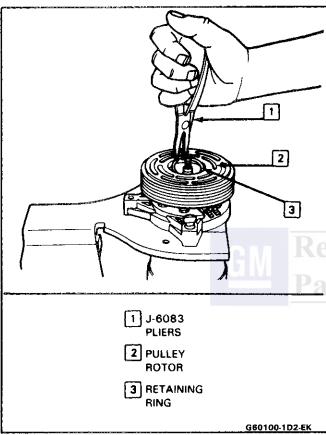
Installing-Removing Pulley Rotor & Bearing Assembly Retaining Ring
